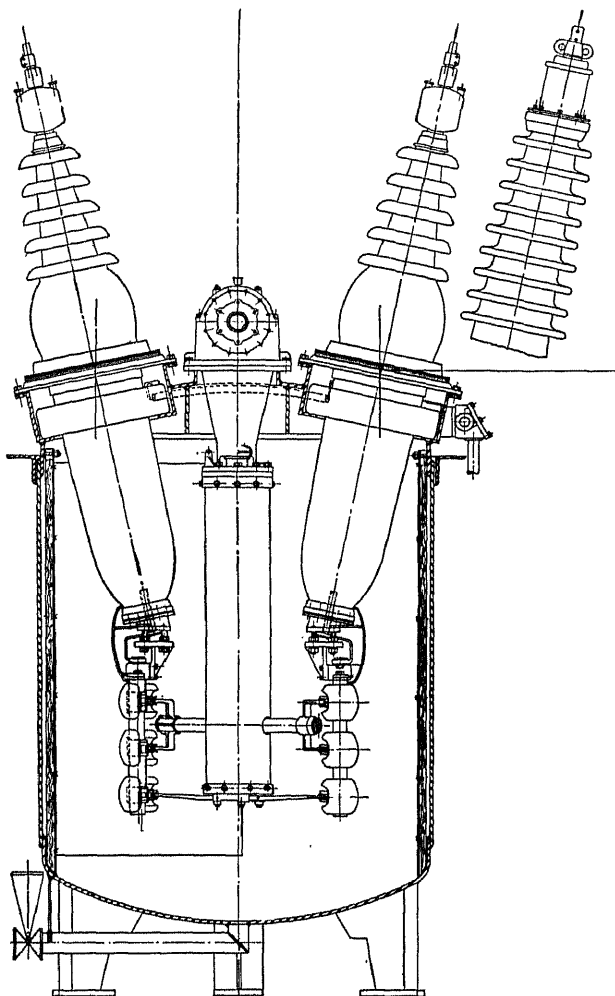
Pacific Electric floor-mounted breaker details.
